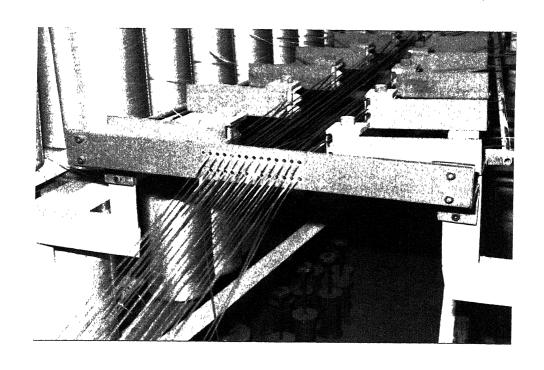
(b) PHOTOGRAPH SHOWING ROVING STAND EYE-LIDS SUBASSEMBLY
